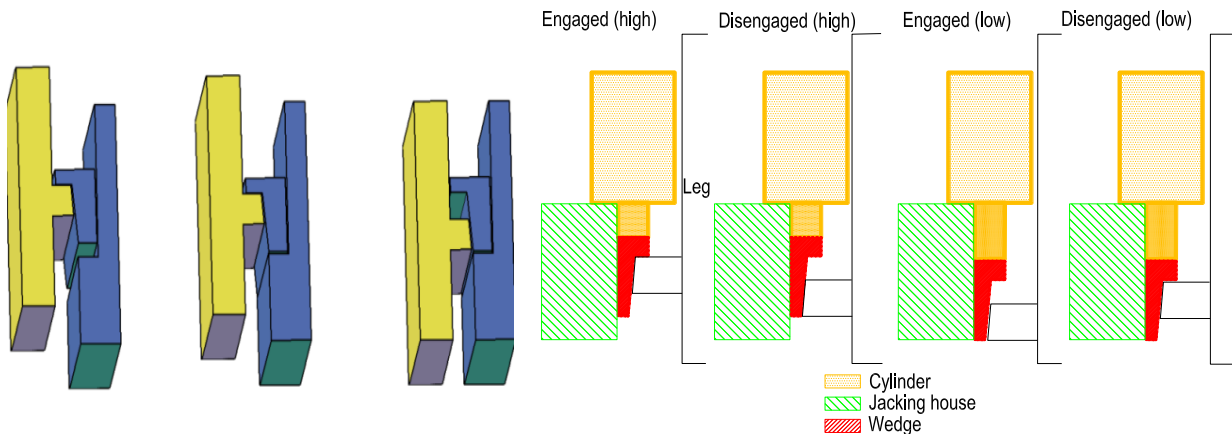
Top spring configuration, yellow = jacking house, blue = leg + wedge; engaged (l = adjusted, m = not adjusted), disengaged (r)
